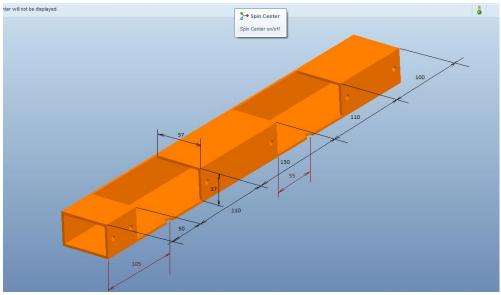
The placement of the pockets for milling operation for vehicle 1. The pocket measurements are marked in black. The placements for the holes for the vehicle axis are marked in red
